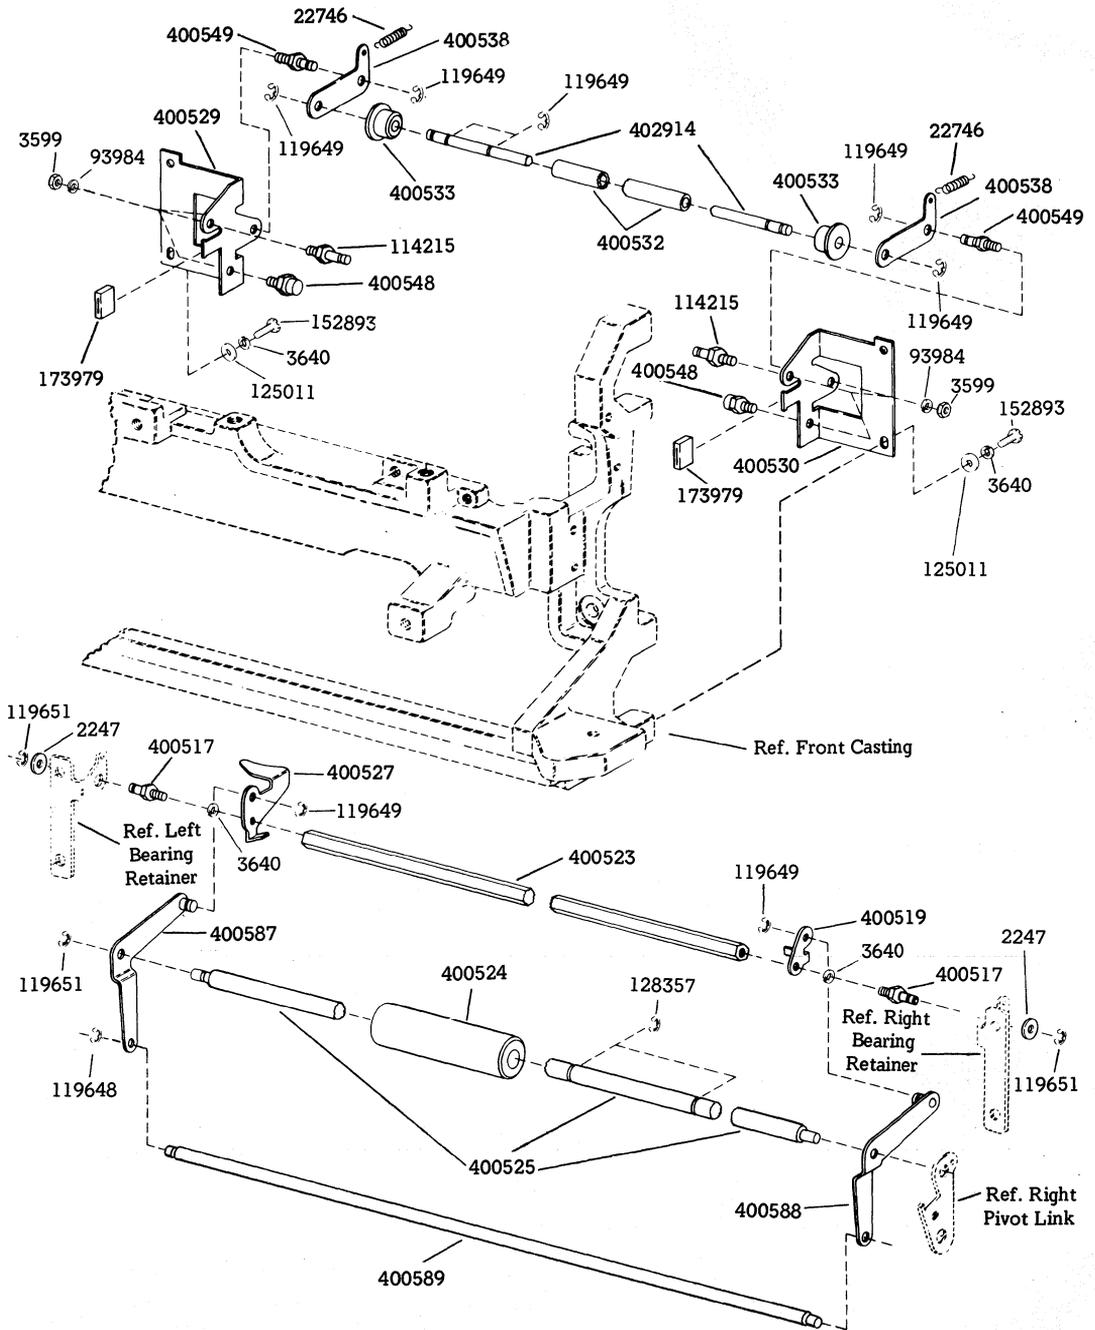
Front Casting Assembly (Friction Feed 40P101 - Early Design) (Cont.)
